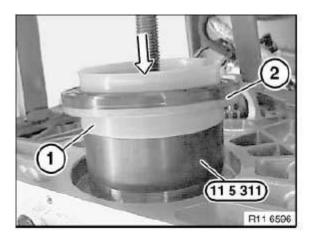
Pushing Radial Shaft Seal Over Support Ring Onto Special Tool 11 5 311 Courtesy of BMW OF NORTH AMERICA, INC.
